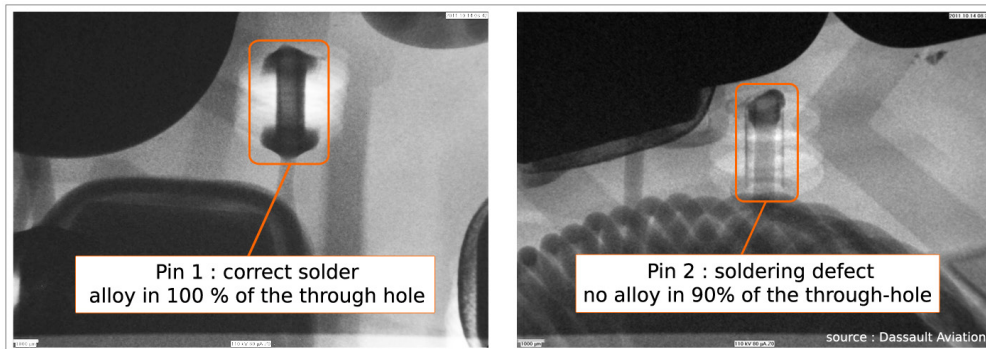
X-ray of the soldering defect on the L4 induction coil
